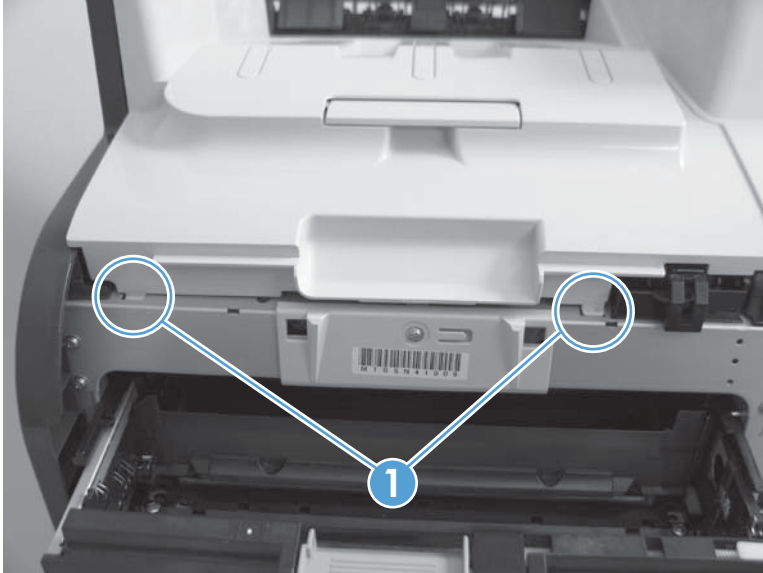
Reinstall the upper-cover assembly (1 of 3)
